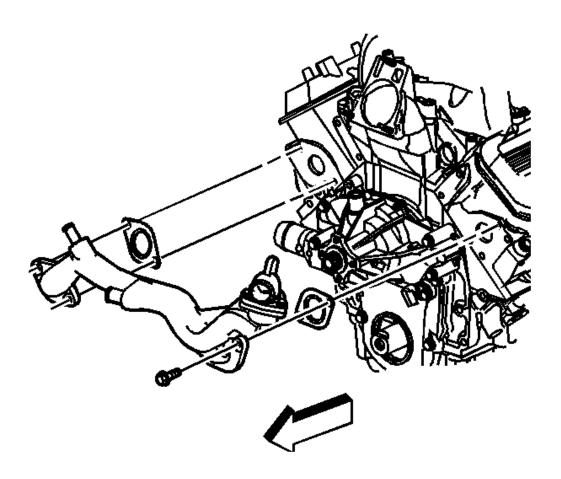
Thermostat Bypass Hose & Clamps Courtesy of GENERAL MOTORS CORP.
